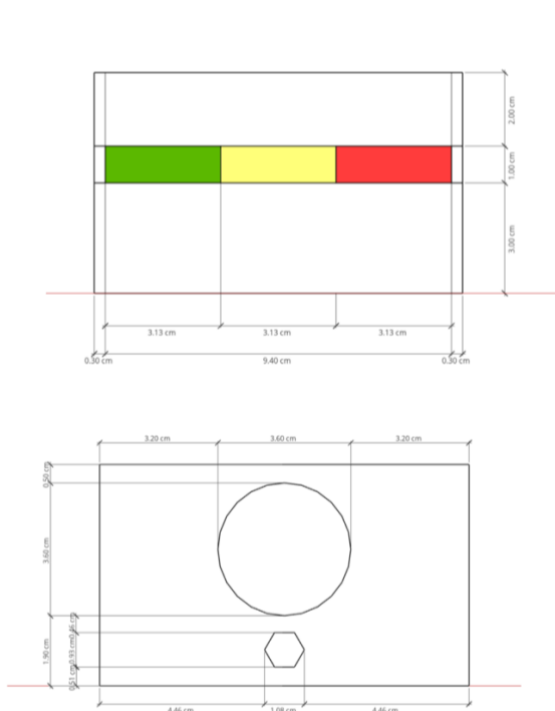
CAD model of the second and final iteration of the support piece. Top: front view. Bottom: back view.
